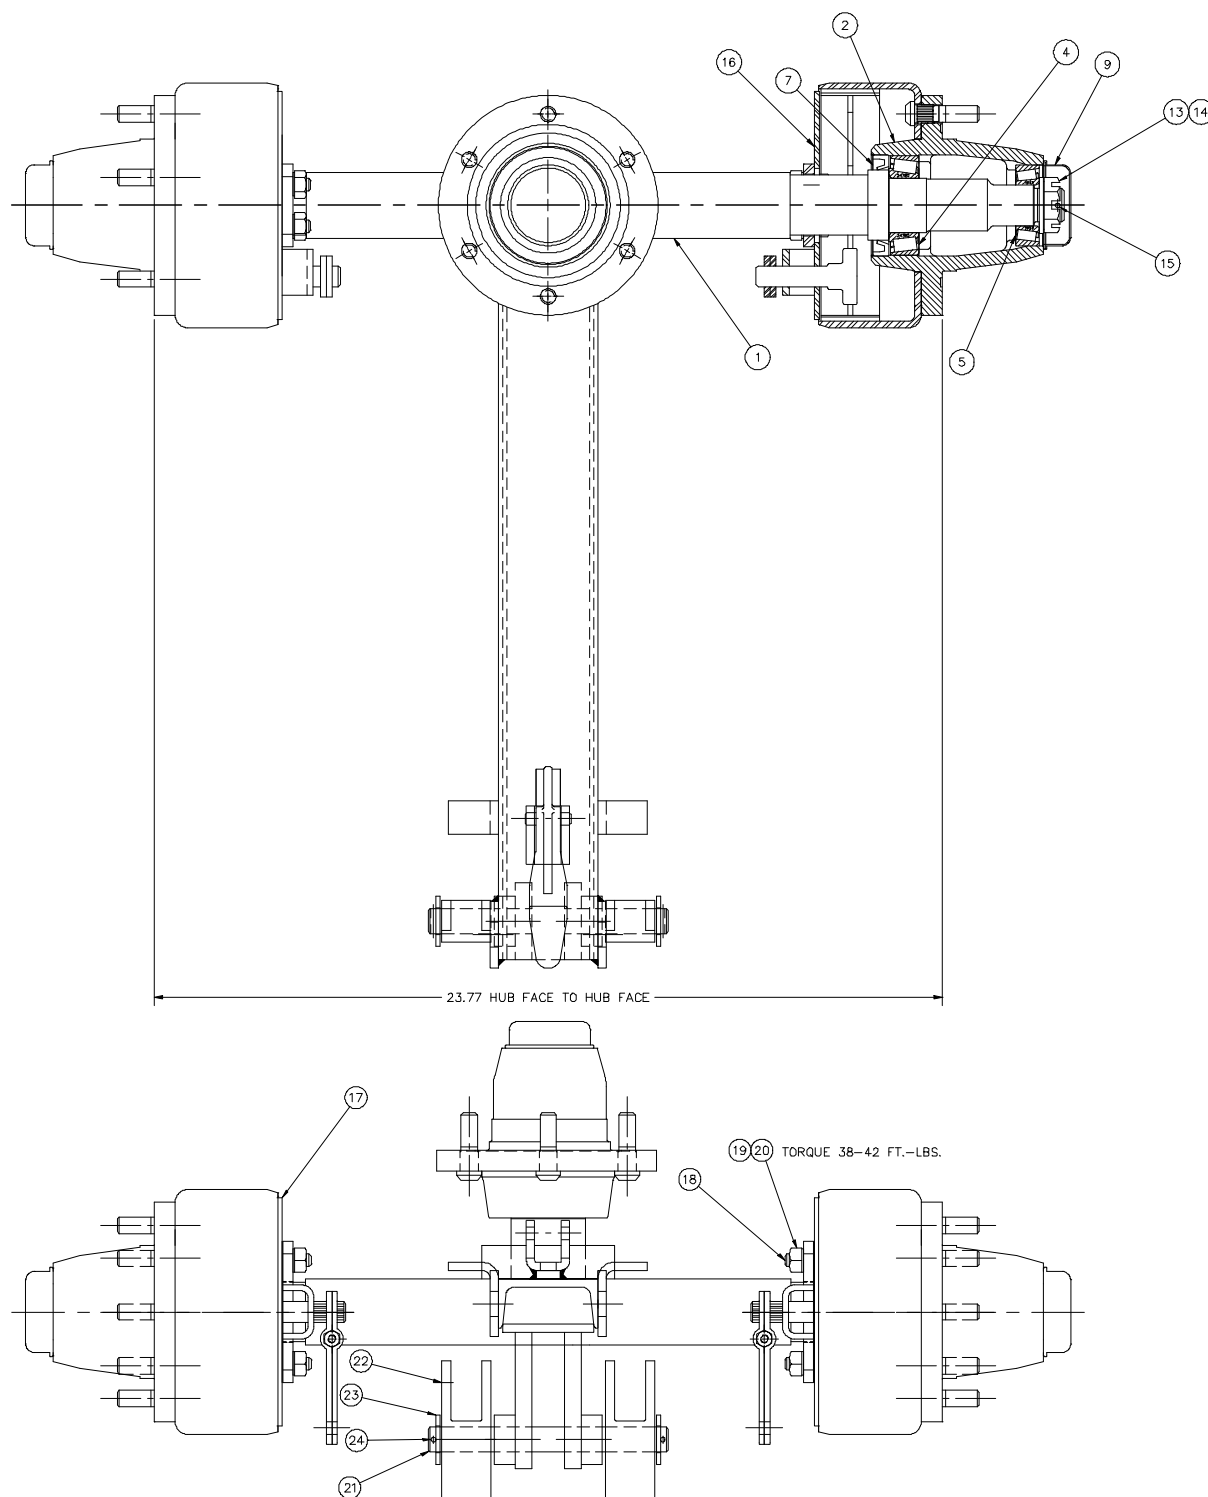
Front Axle Assembly (Sheet 1 of 2)
